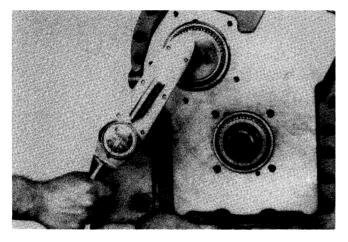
Install retainer plate bolts and tighten to specified torque (see torque chart). Lock wire bolts together to prevent loosening.
